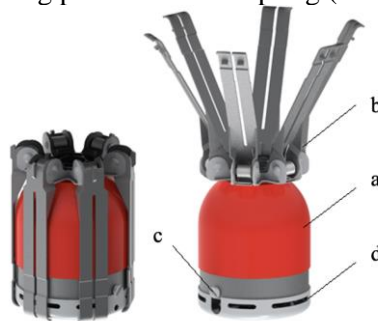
View of the bomb with the folded and unfolded stabilizing vanes and the basic elements of the bomb marked: a – bomb body with fragmentation balls and blasting material; b – stabilizing and braking device; c – blasting cap safety mechanism; d – firing pin holder with spring
